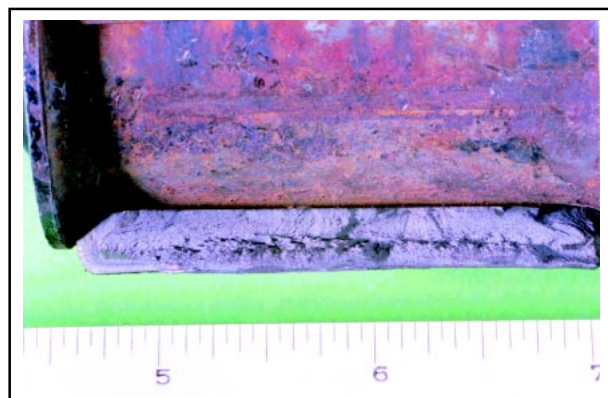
The spring half of the fracture has deep secondary cracking along the midplane.
